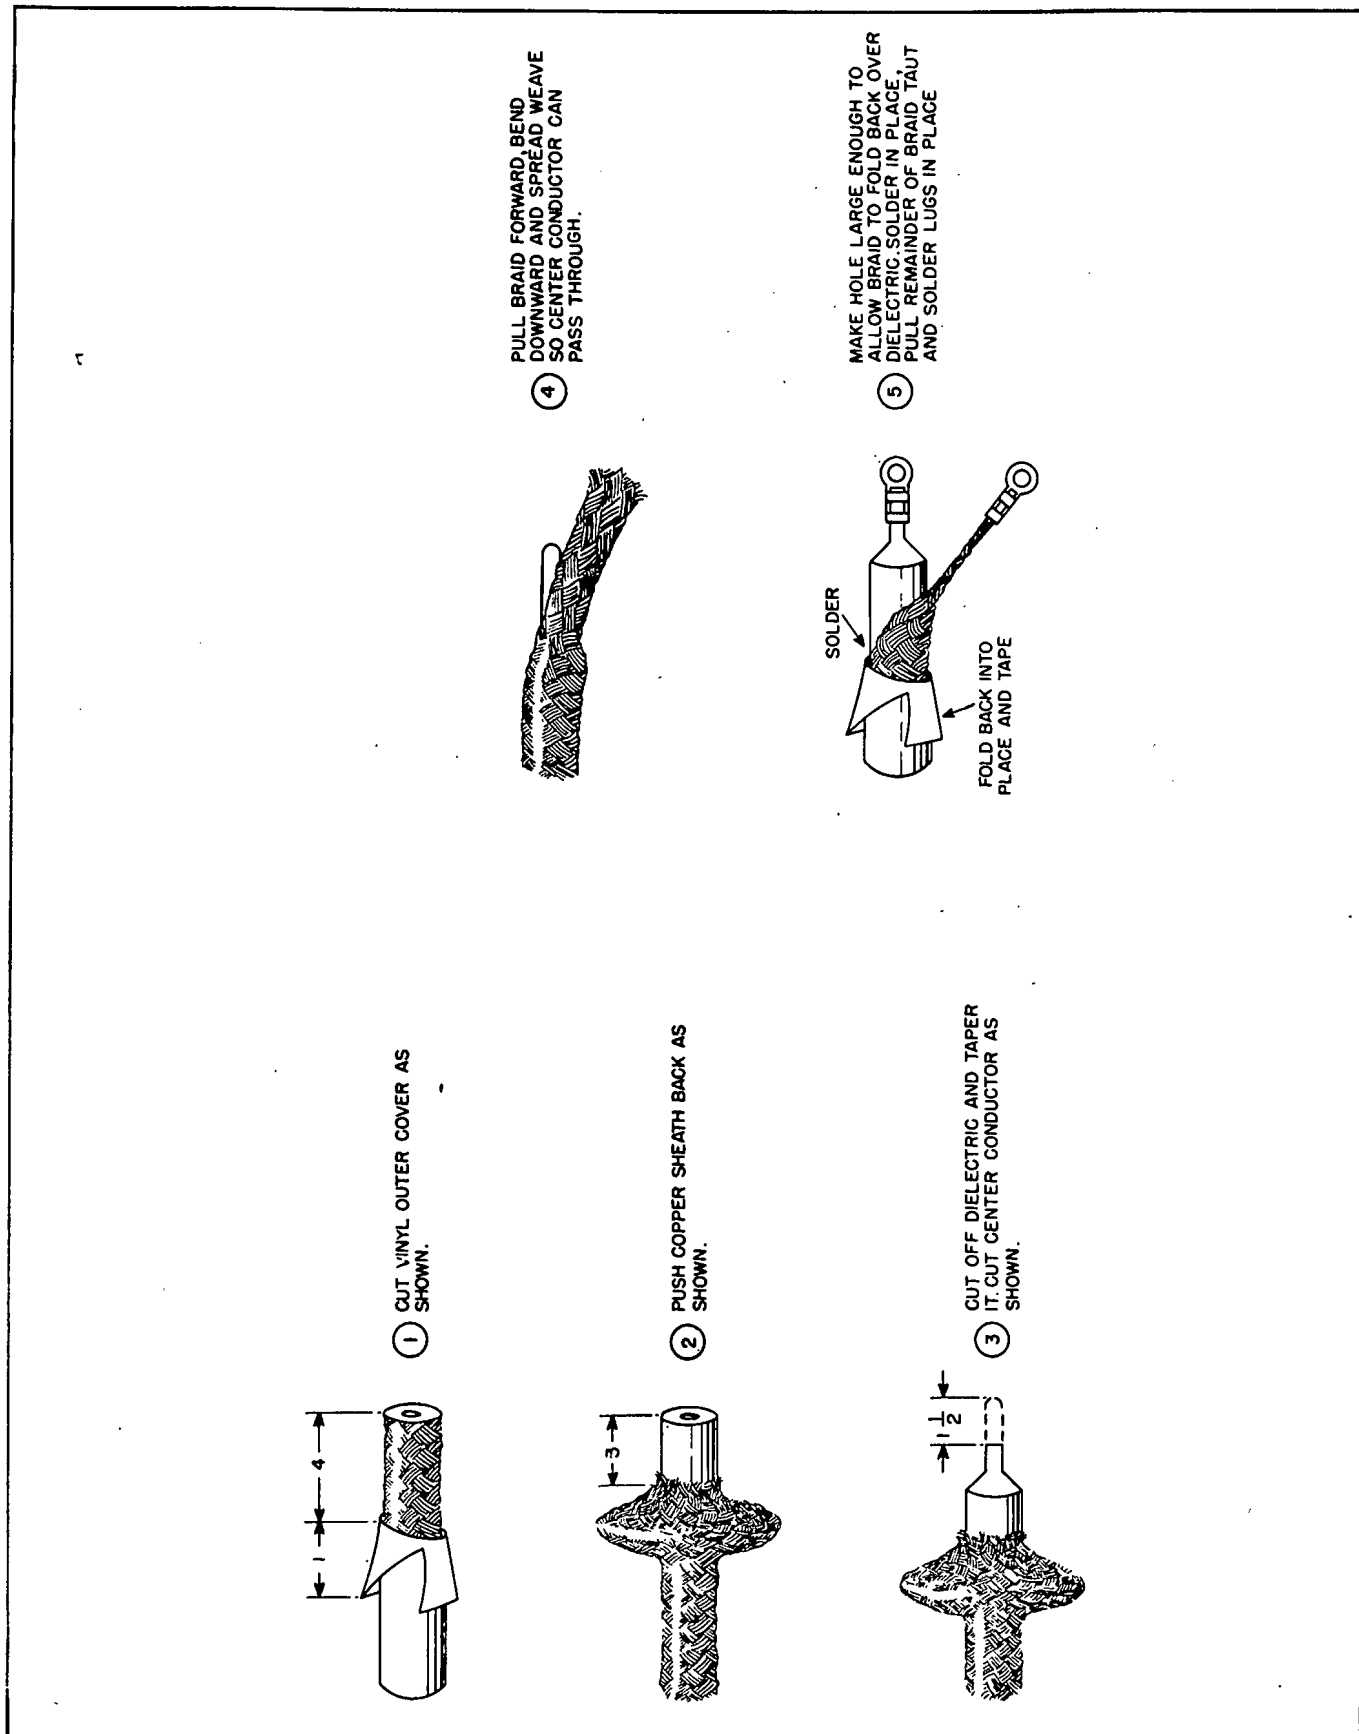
RG-12/U Coaxial Cable, Assembly of Connecting Lugs
